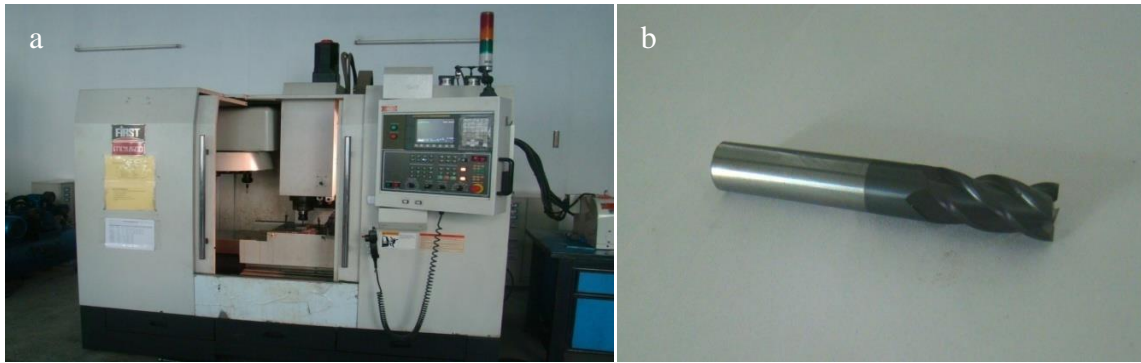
(a) First MCV 600 vertical machining center (b) Milling cutter
